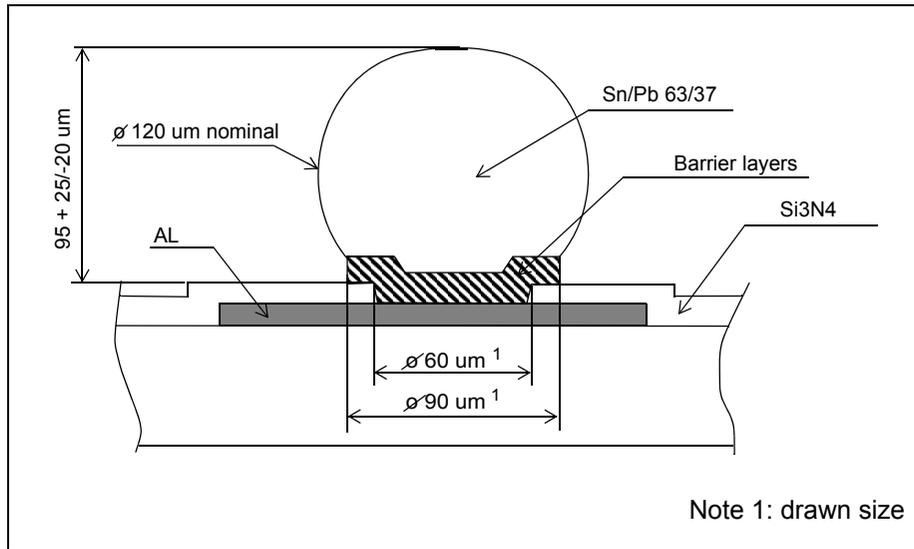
Solder Bump Appearance of ZL70271/72/73/74
